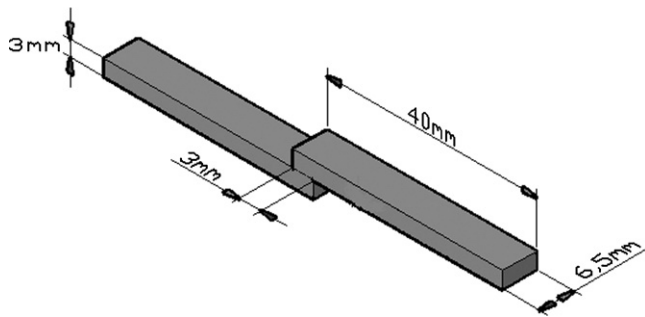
Schematic representation of the brazed specimens for shear testing in this study.
